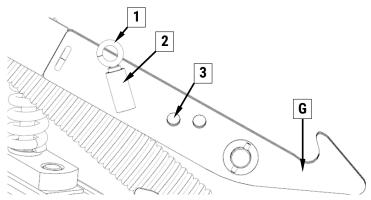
1 - pin, 2 - bush, 3 - hole in the bar, G - lock
